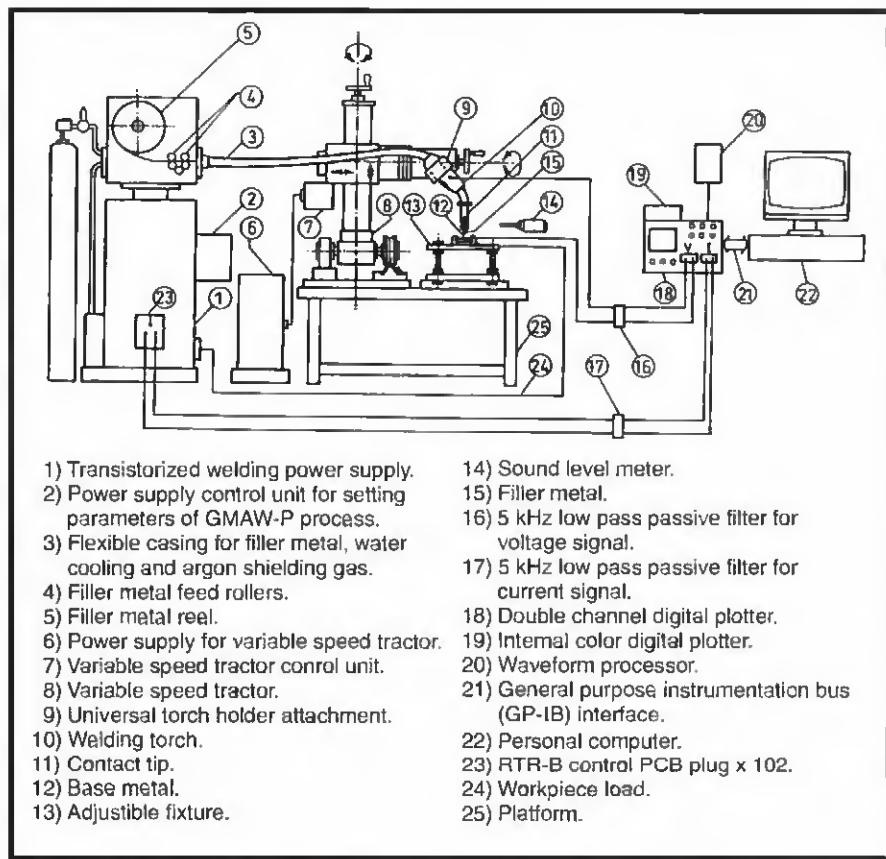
Schematic of experimental setup of pulsed current gas metal arc welding.
